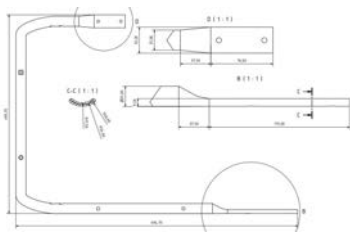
2D CAD Draft of the top part of the Lawnmower Handle
